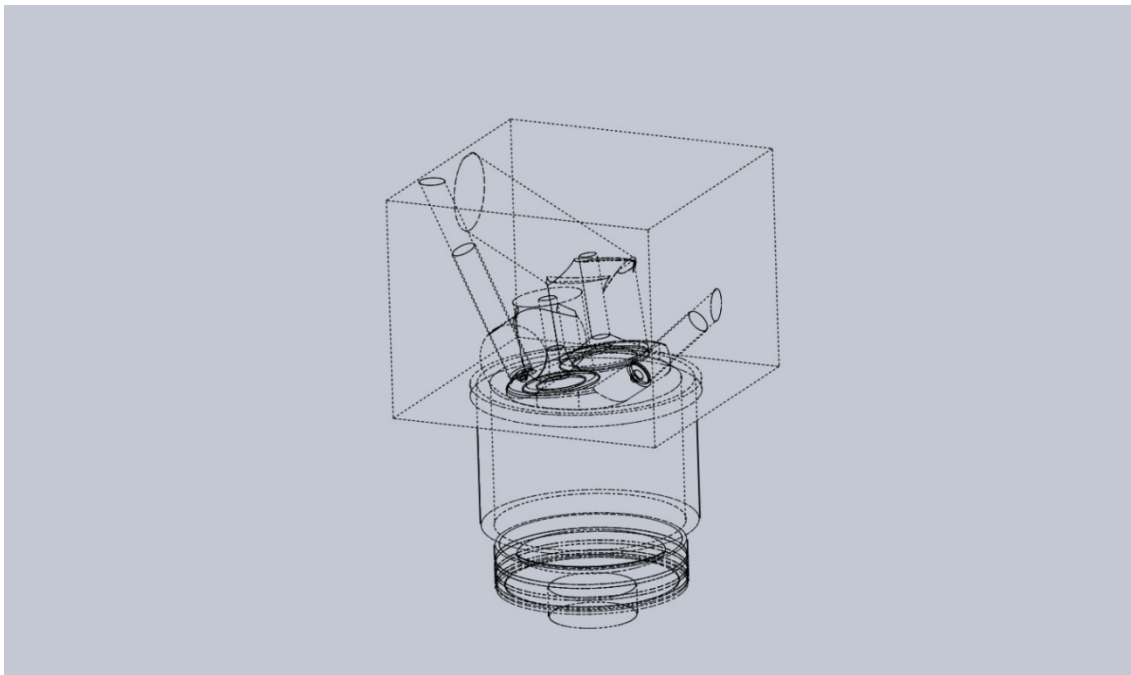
(b) SolidWorks Assembly of Rotax Engine
